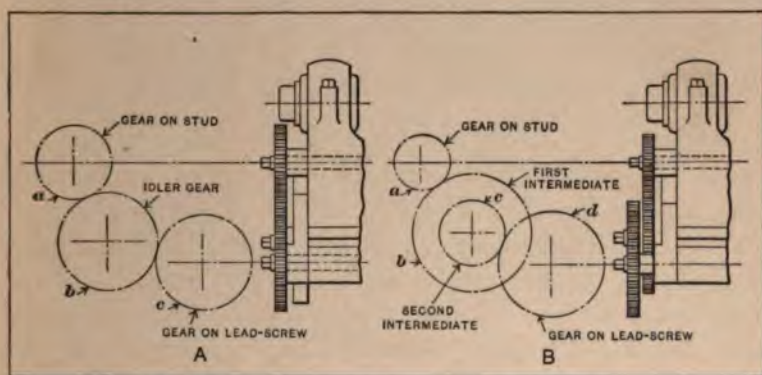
Simple and Compound Gearing for Screw Cutting Lathe
